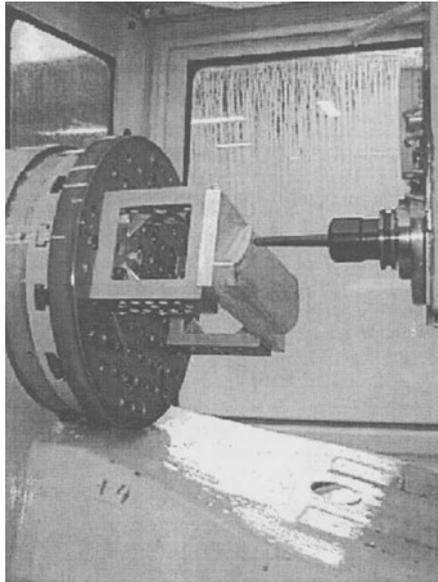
Overview of the machine during the 5-axis milling finishing pass
